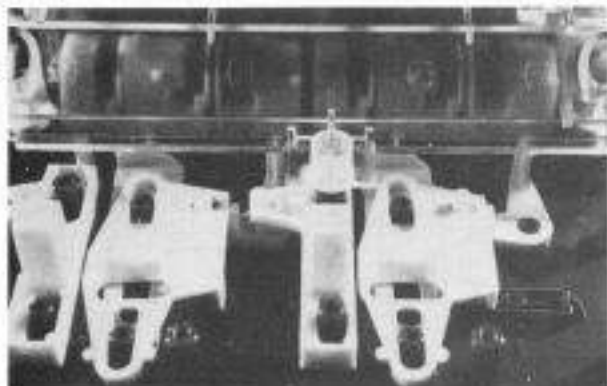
Joystick action of gear meshing. The large cylinder contains a multitude of gears. Moving the joystick causes a small pointer to move on the gear cylinder, allowing certain gears to mesh.
